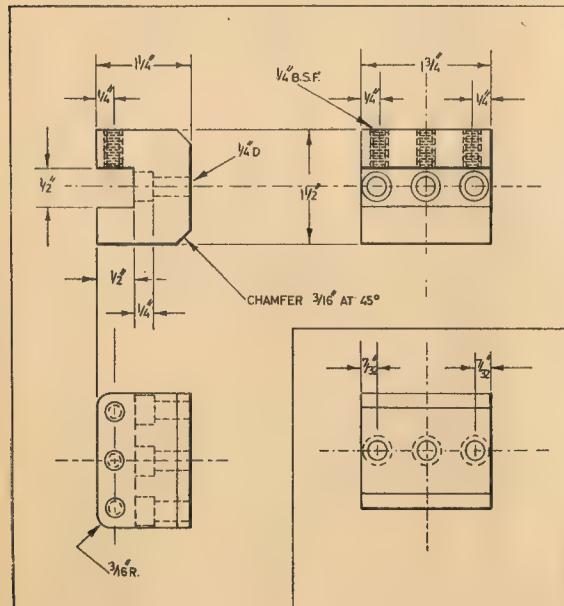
Details of the toolholder. The rear view showing positions for fixing the screws is shown in the inset
